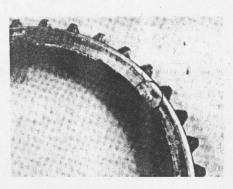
Blocker ring with small "B" imprinted on ring at small end of cone.
